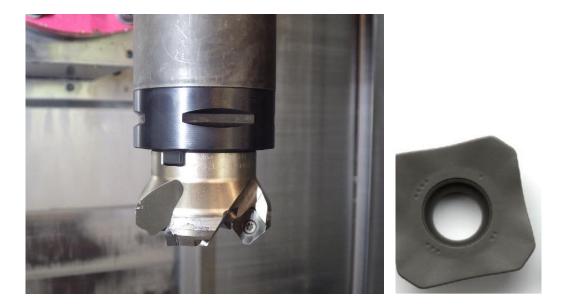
(a) Cutting tool; (b) Cutting insert.
